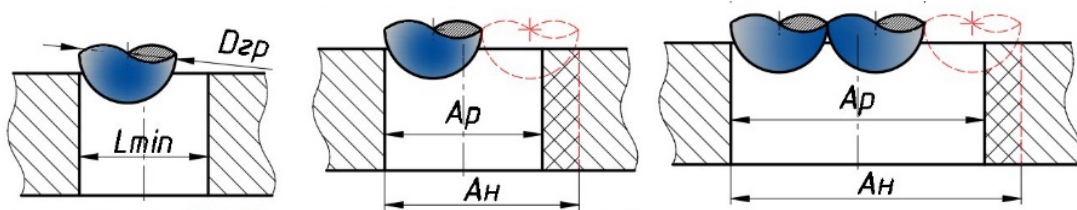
Dimensions of holes that prevent jamming of the working environment bodies:
